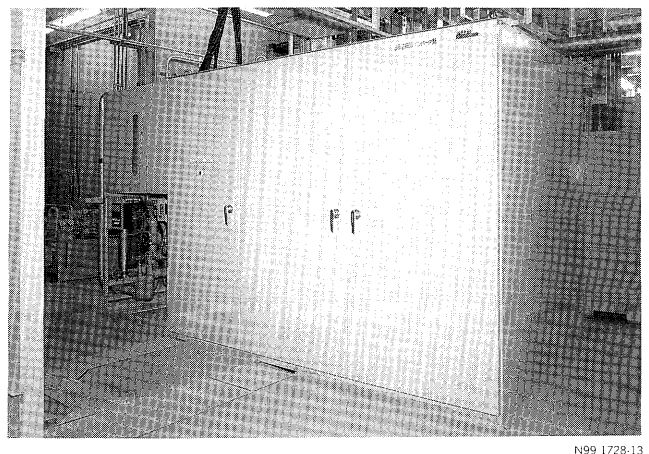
shows an outer view of Transistor Inverter-Adopted Billet Heater F180H, and Fig. 10, a dimensional comparison with a conventional type Billet Heater.
